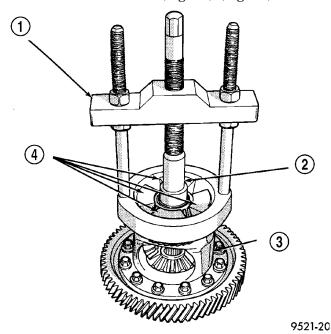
Remove Differential Bearing Cone from Diff. Case Side
